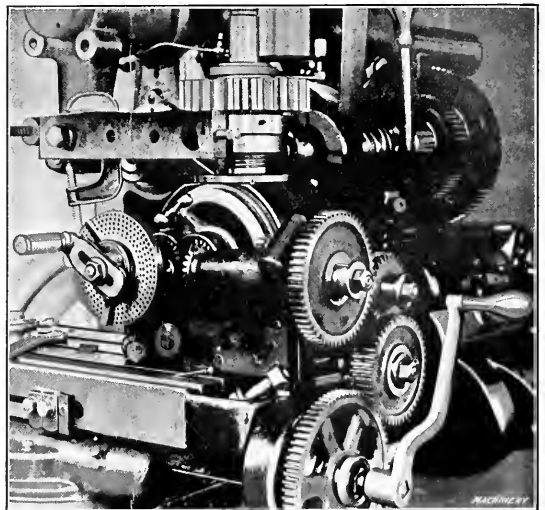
Milling Machine set up for laying out the Shape of a Hob Tooth
